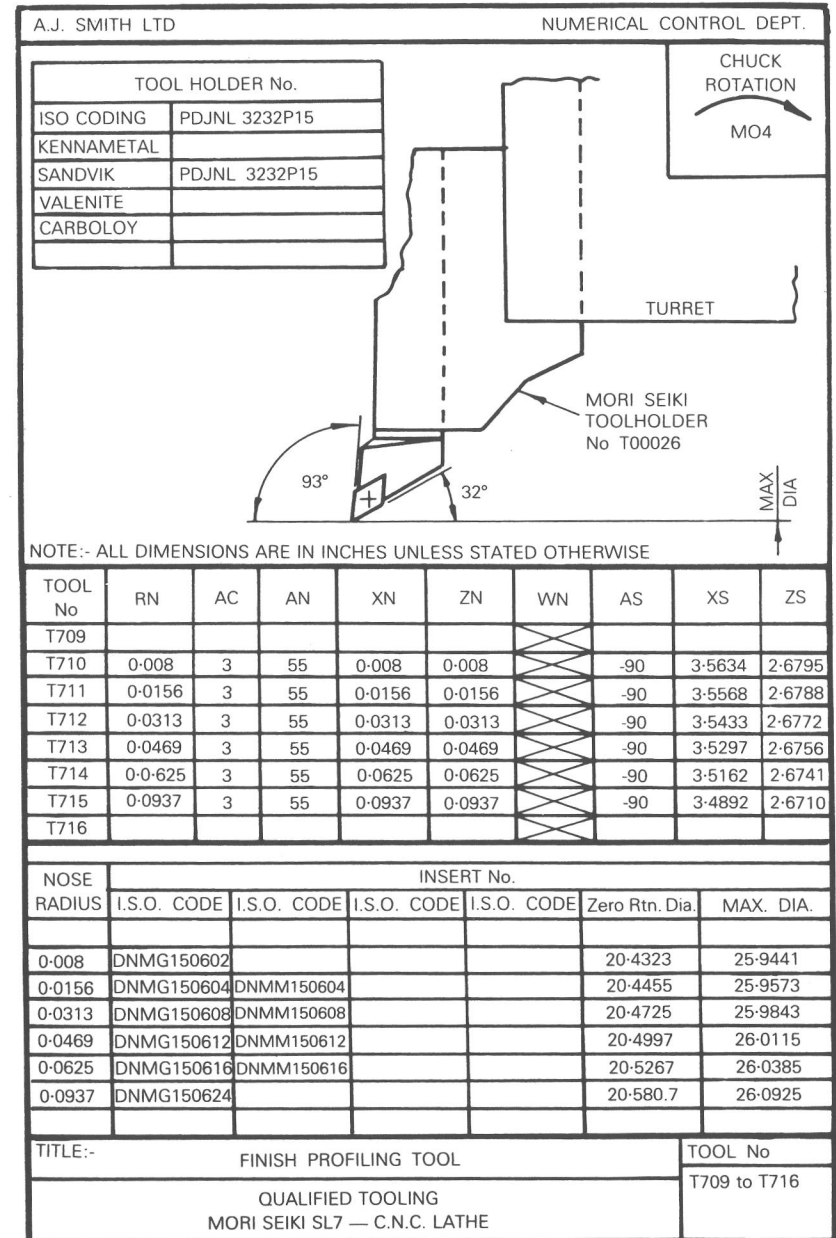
Company-devised tool standard. (All units are given in millimeters.)
